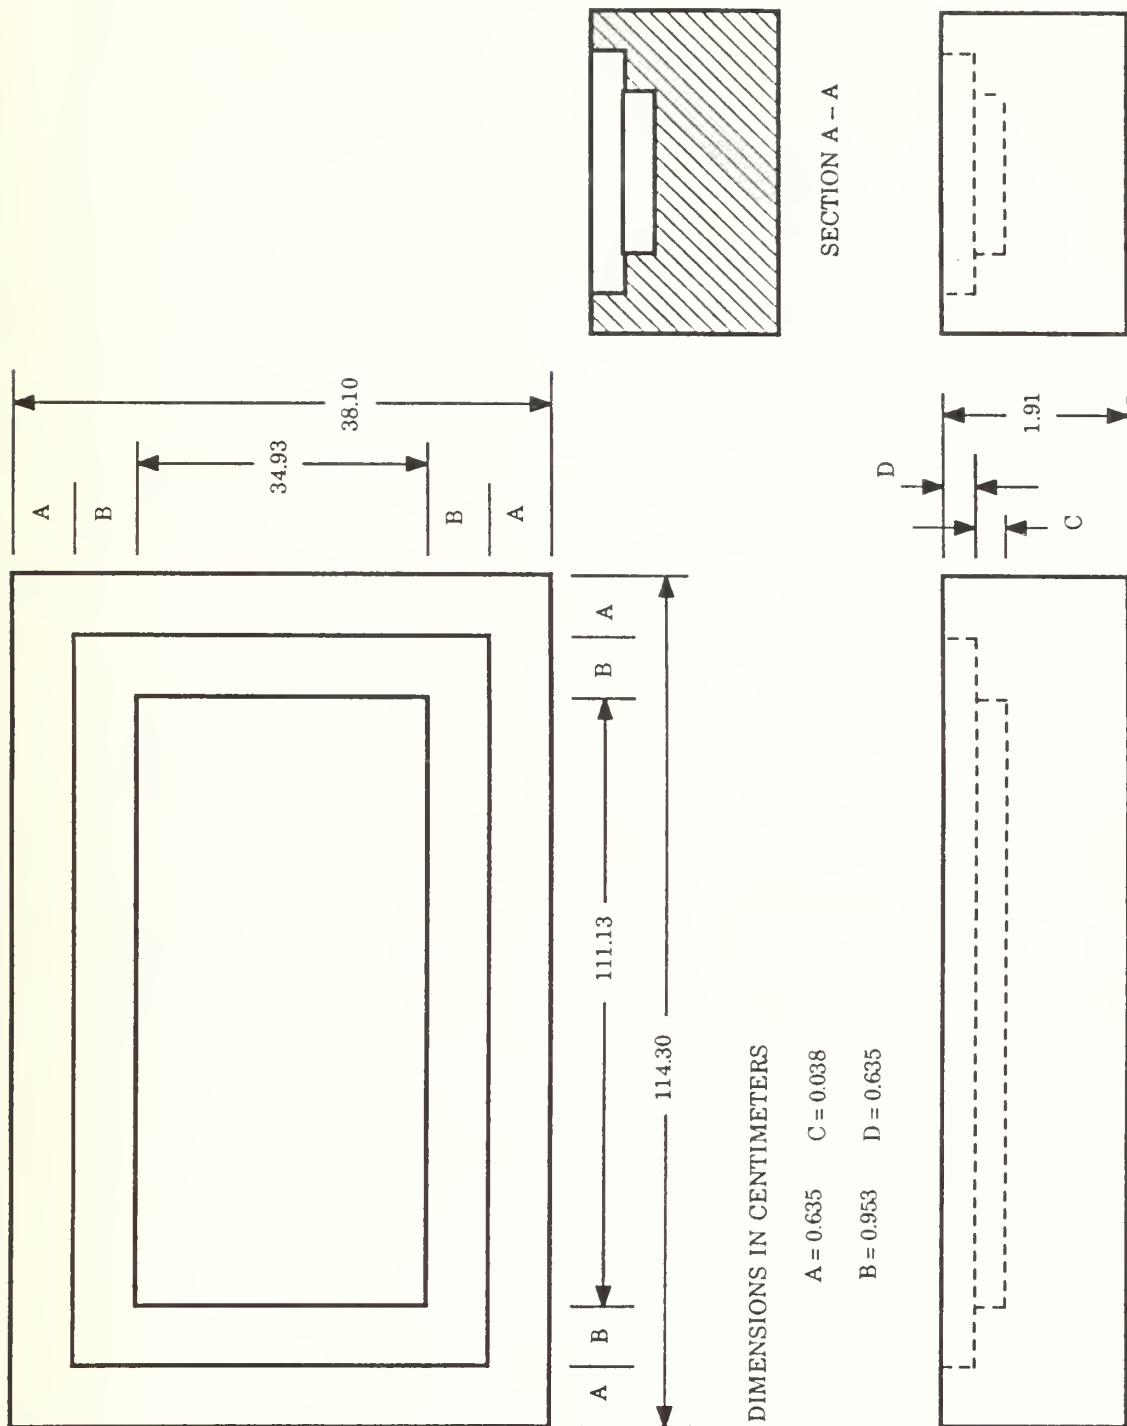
Design Drawing of the Pocket Plate Configuration.
